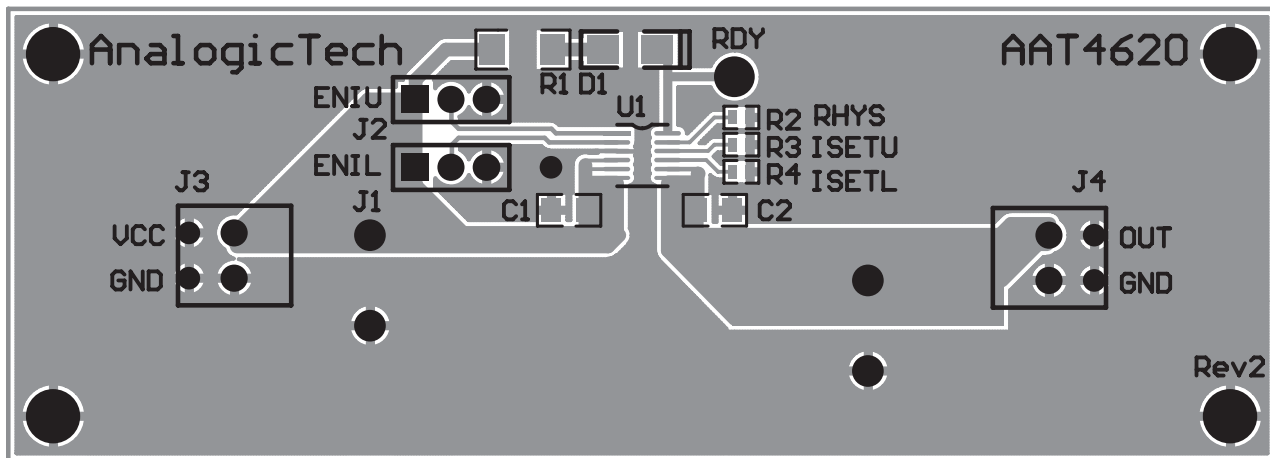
AAT4620 Evaluation Board PCB Top Side.
